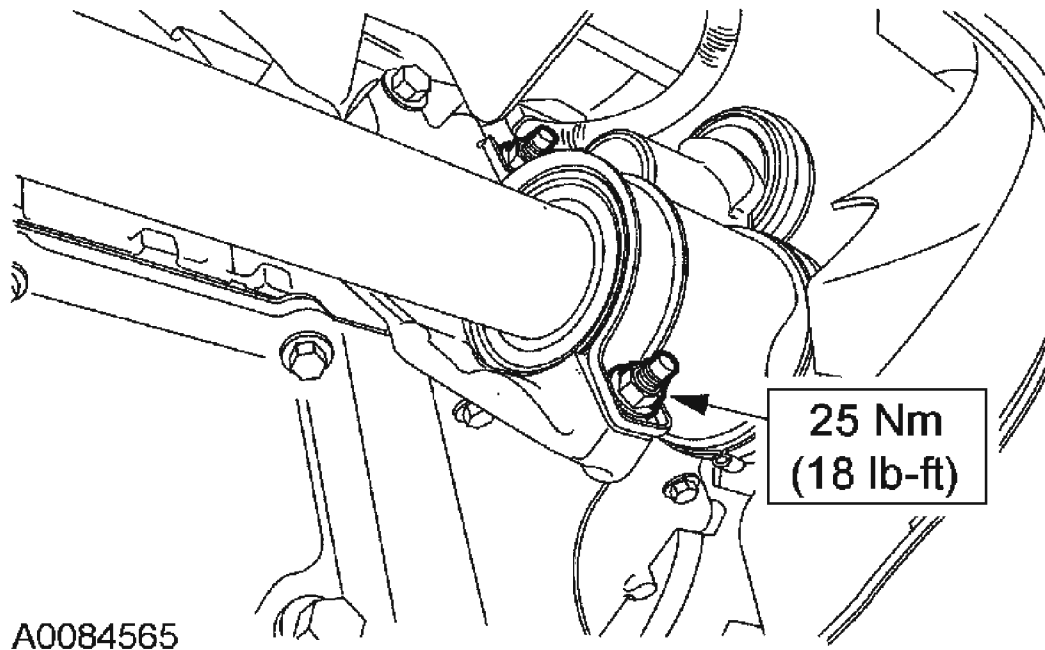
Installing Mounting Bracket For Front Drive Halfshaft Intermediate Bearing
